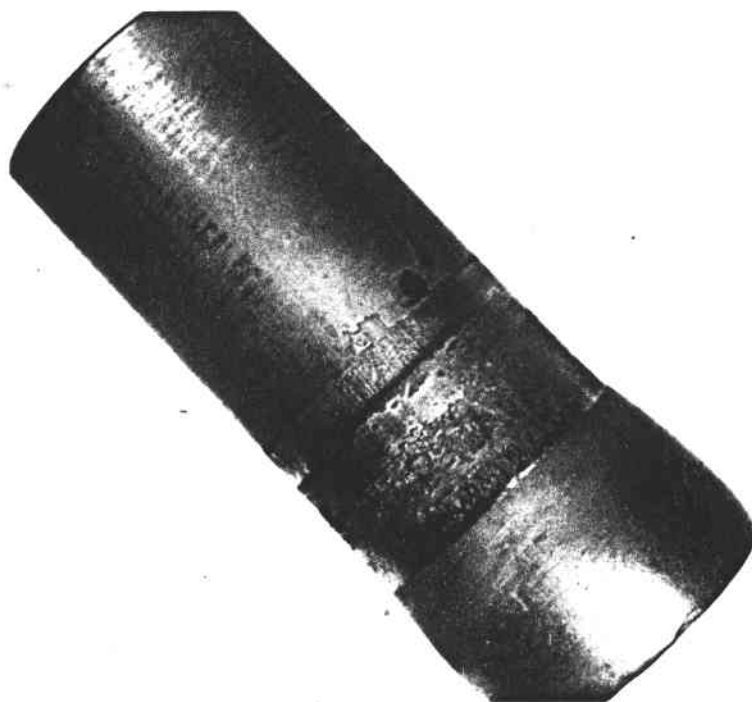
Hot Pressing of Two Sintered Pieces with Sinterable Powder as Joining Material
